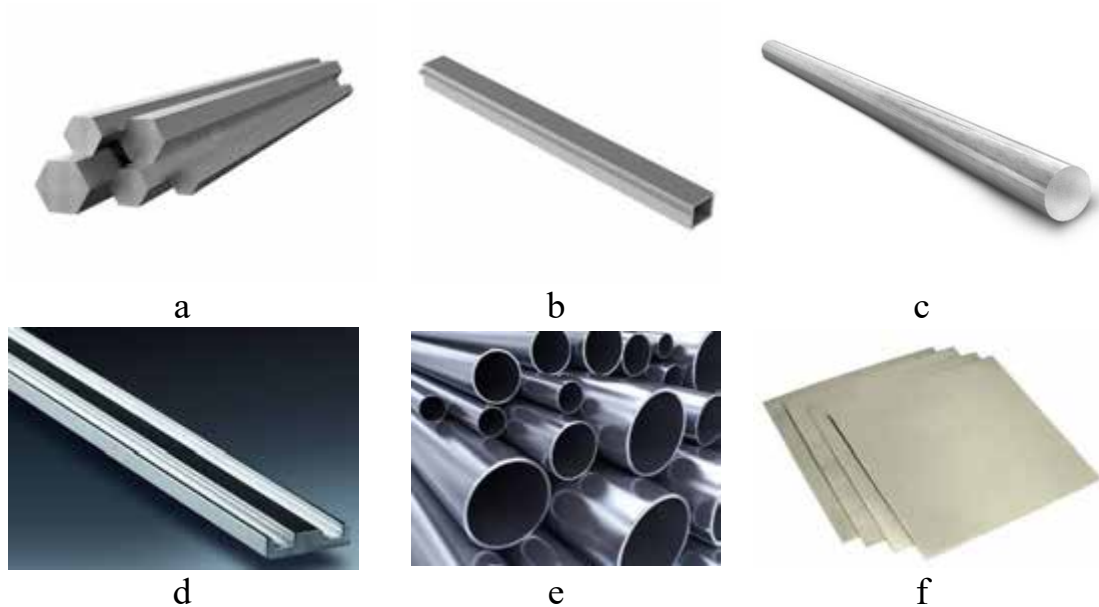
Pressing parts: hexagonal (a), square (b), round (c) rods and shaped section (d), tubes (e), sheets (f)
